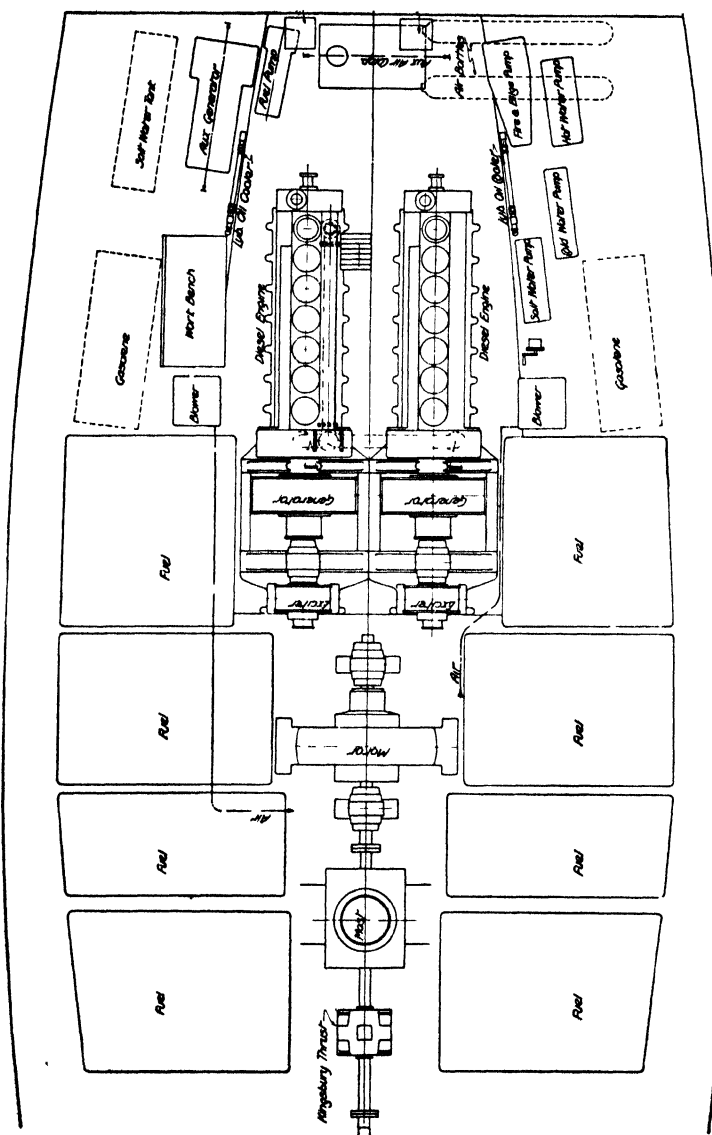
Typical Diesel-Electric Engine Room Layout for Yacht
